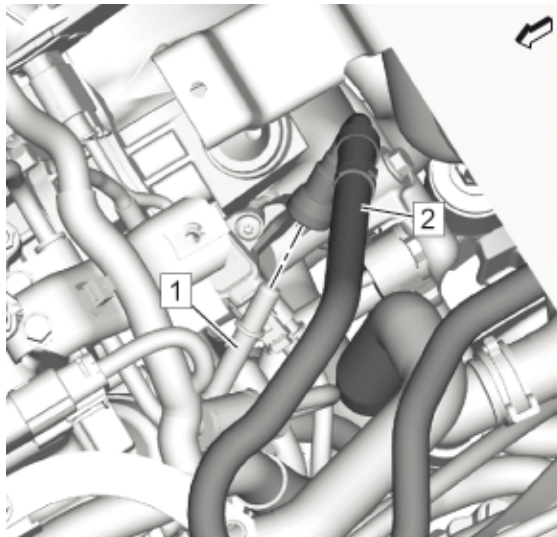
Fuel Feed Front Pipe And Fuel Injection Pump
